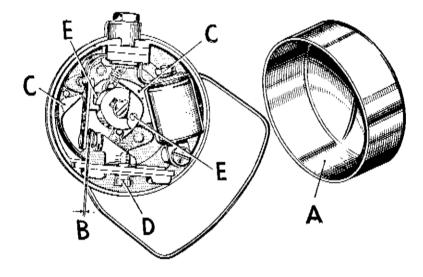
A.—Contact Breaker and Auto Advance Mechanism,
